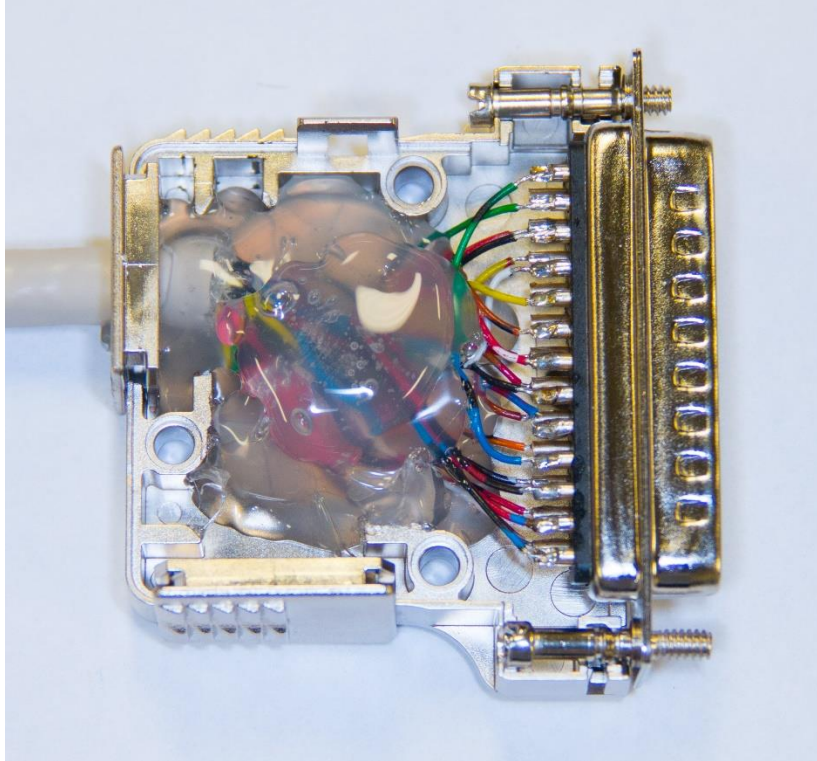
Wires secured in D-Sub enclosure using hot glue. Also note the addition of the cable slot block tab (bottom left) and jackscrews (threaded through the DB25 connector).
